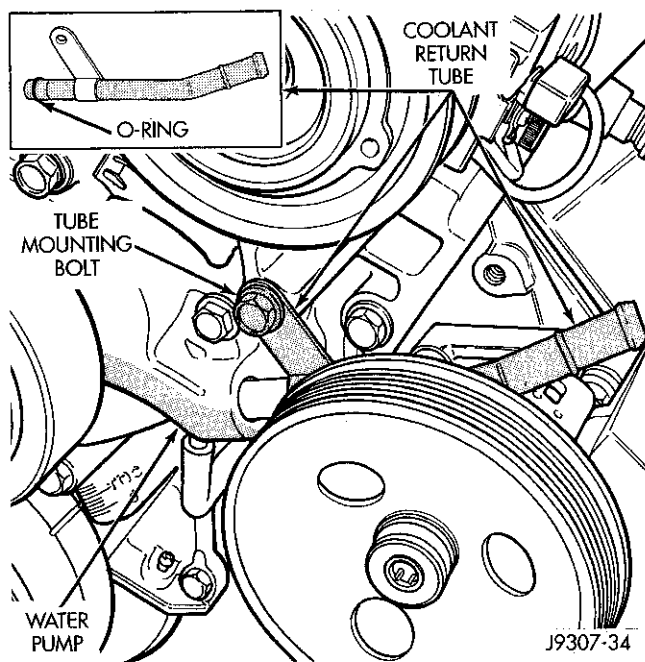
Coolant Return Tube—3.9L V-6 or 5.2/5.9L V-8 LDC-Gas Engines
